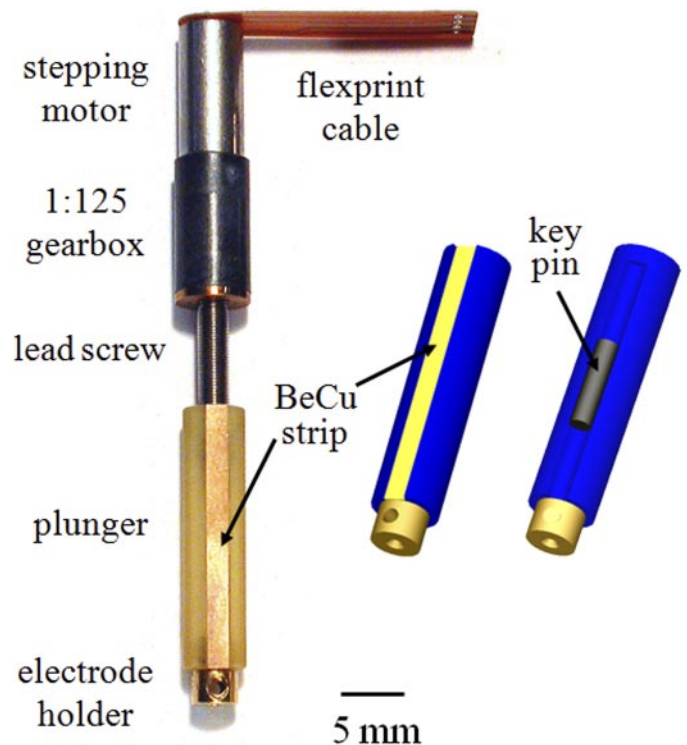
Photograph of a fully assembled linear actuator. The colored pictures to the right show design drawings of the plunger, illustrating the 2 types of slots machined into the body of the plunger.
